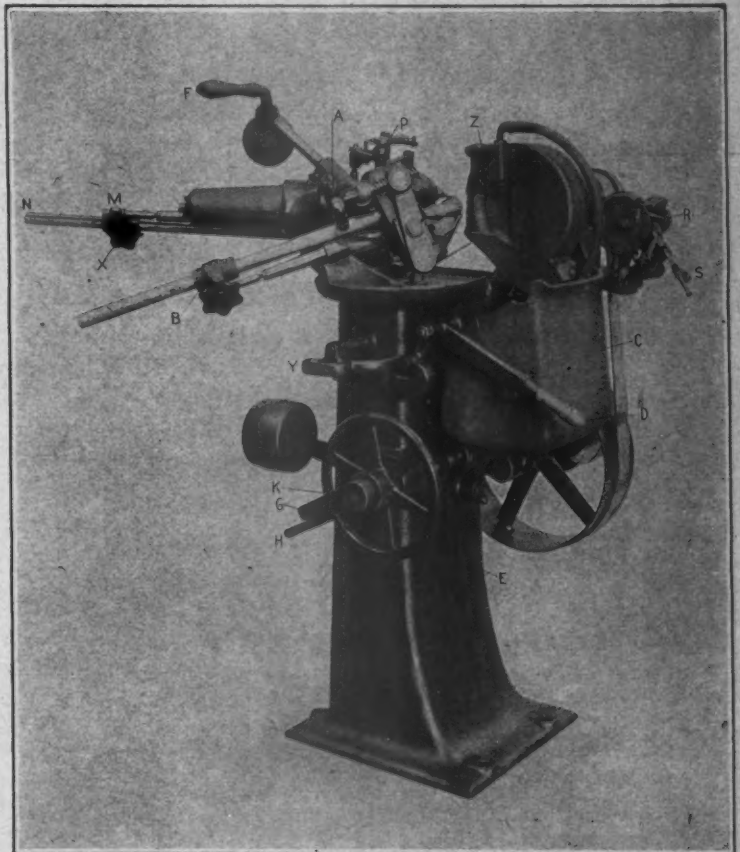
PATENT IMPROVED DRILL-GRINDING MACHINE—WILLIAM SELLERS & COMPANY.
